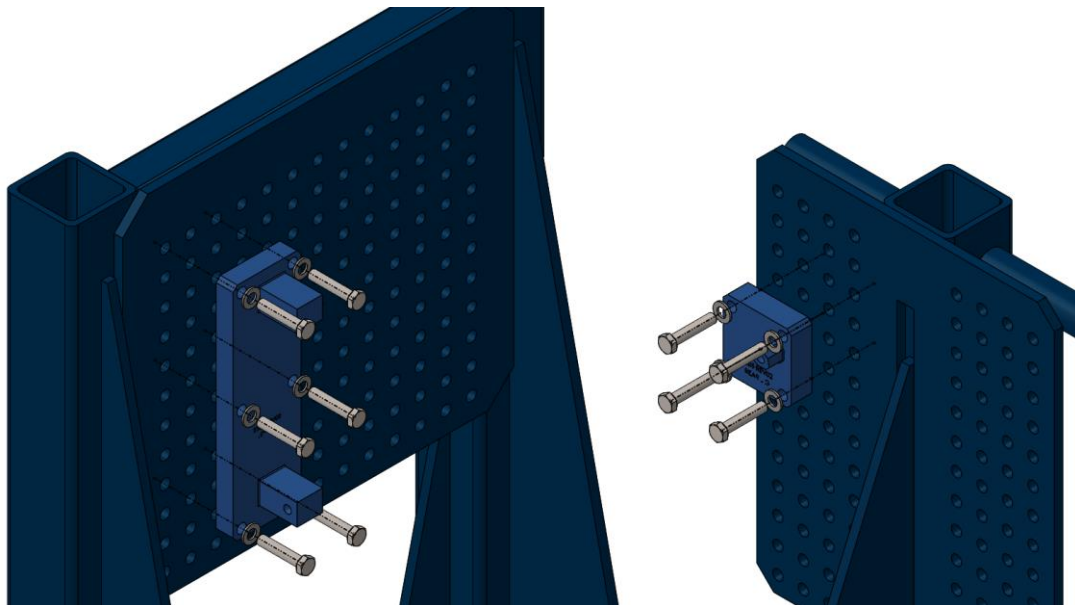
Example of the CCB fixtures mounting on the CCB supports
